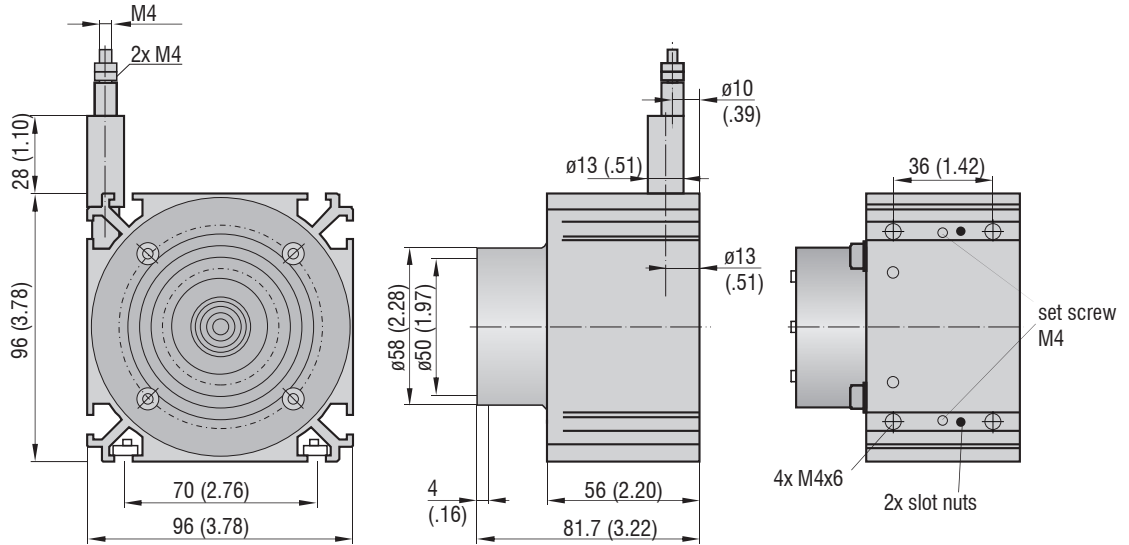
WDS-P96-M, dimensions in mm (inches), not to scale
